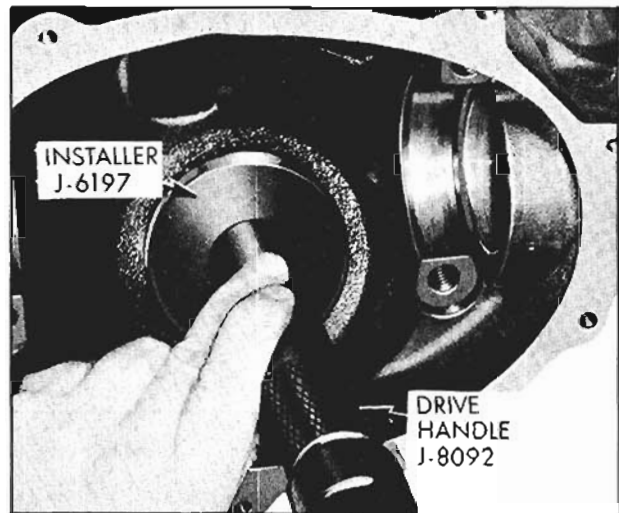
Installing Rear Pinion Bearing Outer Race
